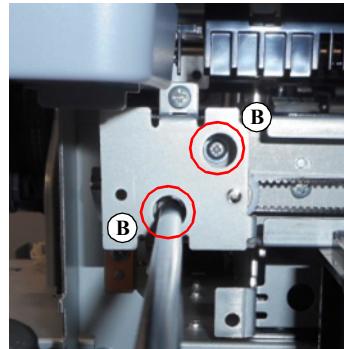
Removing the CUTTER MOTOR ASSY (3)
